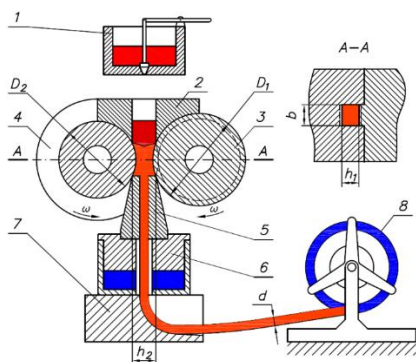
Combined processing unit CRE-200: 1 – mixer furnace; 2 – proportioner; 3 – roll with a protruded part; 4 – grooved roll; 5 – extruding die; 6 – ring hydraulic cylinder; 7 – tracking unit; 8 – coiler
